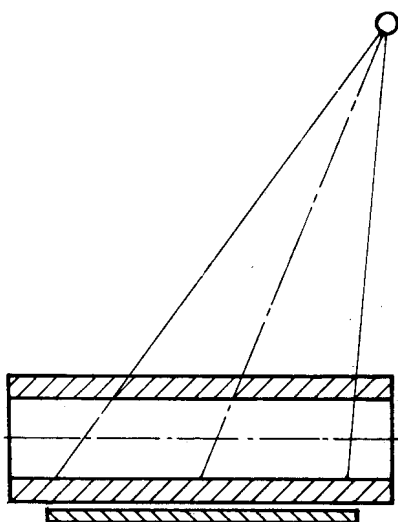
ARRANGEMENT VI, DOUBLE WALL PENETRATION, DOUBLE WALL EVALUATION SOURCE AND FILM OUTSIDE
